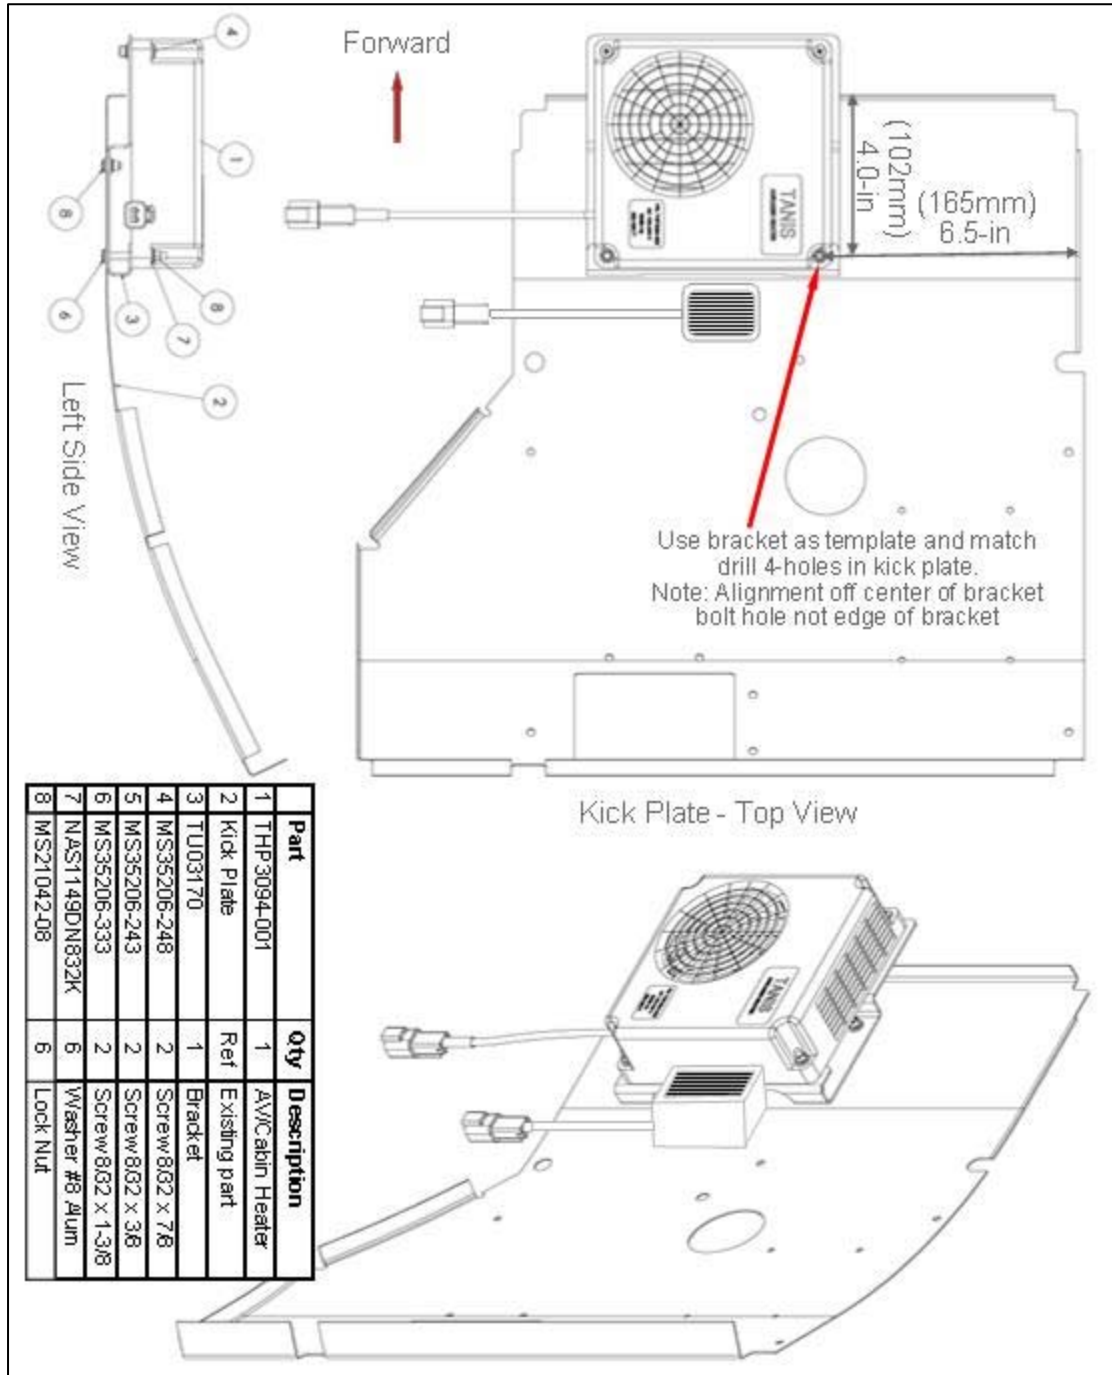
Example of Heater and bracket on kick plate. Using bracket as template, align right front hole of bracket as shown and match drill plate. Deburr and protect holes. Using supplied hardware mount heater and bracket on kick plate. Be careful not to distort the bracket when tightening the two long front screws.
